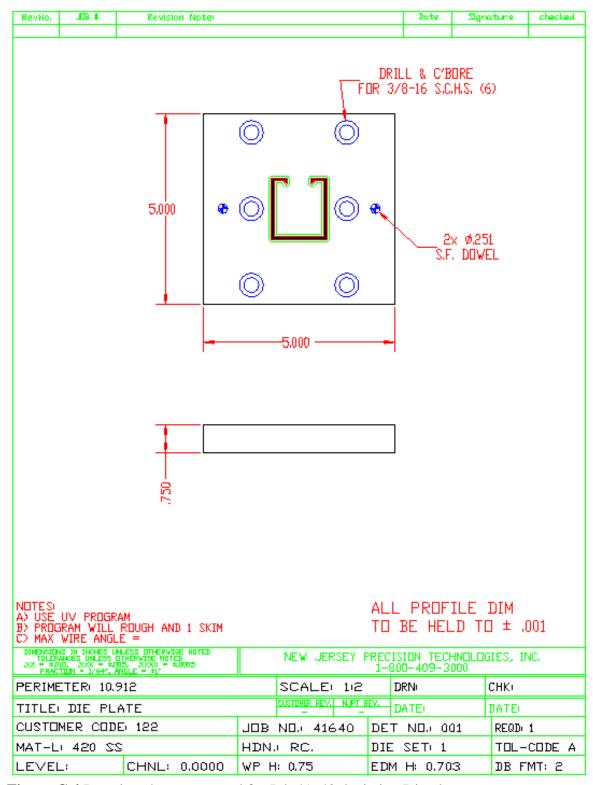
Drawing sheet generated for Job 41640 depicting Die plate.
